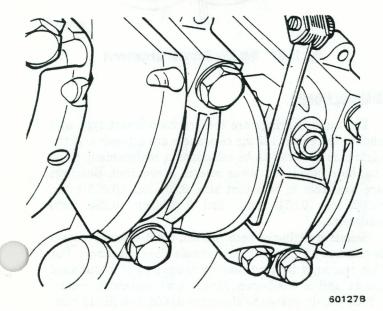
B-34 Measuring Connecting Rod Side Clearance
